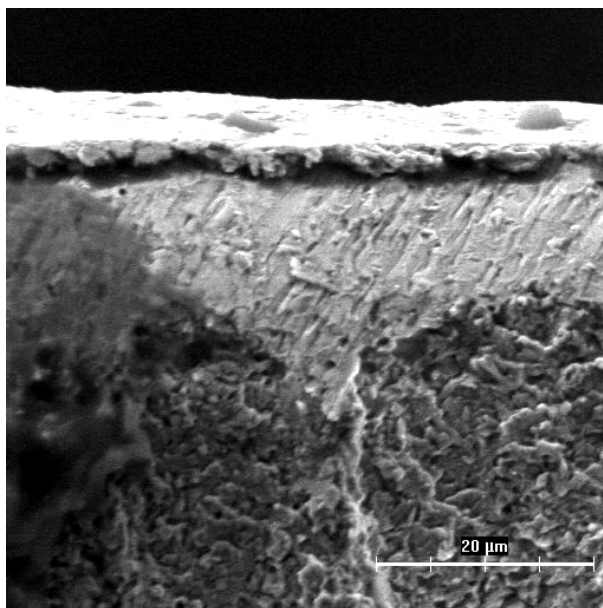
Surface fracture of TiAlN-coated rod after the bending strength test.
